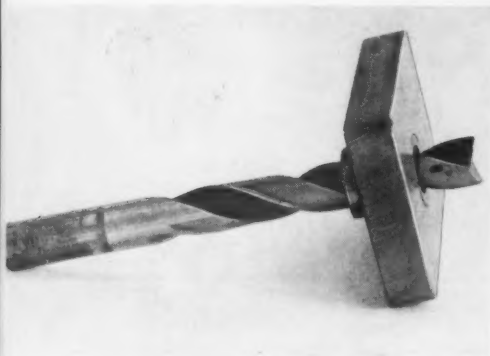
Illustration showing drill ground to a "fishtail" point inserted in drill bushing of jig block used for guiding purposes.
